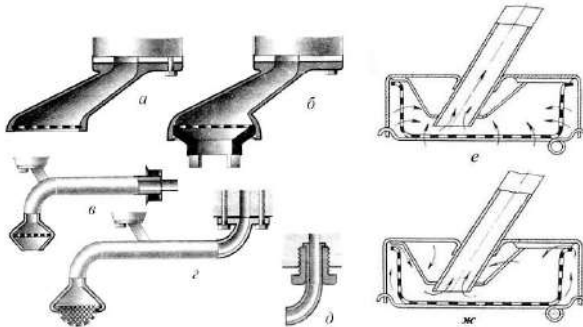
Some common oil receiver schemes: *a*– cast aluminum oil sump – oil pump cover; *b*– the same, but the intake opening has a rubber deflector that allows deformation of the crankcase pan; *c*– oil receiver with a tube sealed with a rubber ring; *d*– flange mounting of the oil receiver tube allows for the greatest deformations in case of damage crankcase pan; *e*– fastening the tube with a fitting; *f*– *g*– ways oil movement
